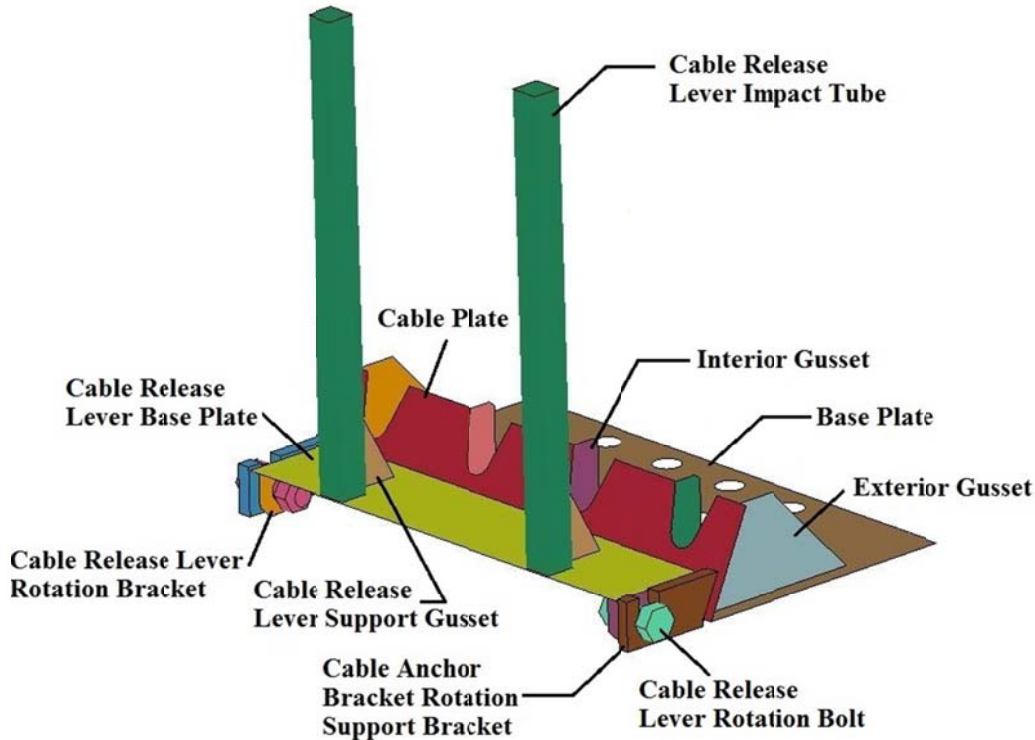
Redesigned Cable Anchor Bracket Assembly Model
